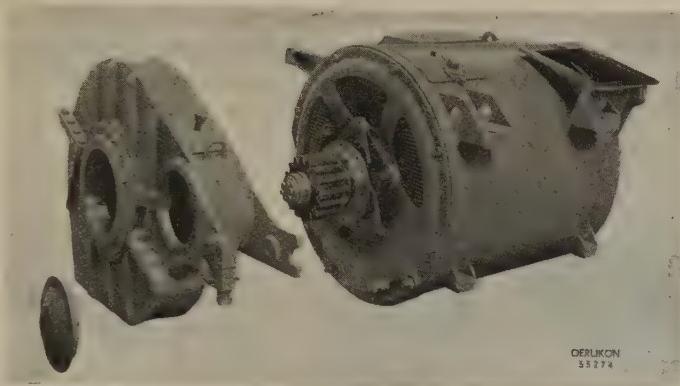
Traction motor (direct) (50 cycle), type 14-HW-750 (of the motor coach in figures 549 and 550) with pinion and gearcase for mechanism shown in figures 551 and 552. Behind the pinion are the plate and springs (fig. 552, right). In the front of the gearcase (left) are the bearings H (fig. 552).
